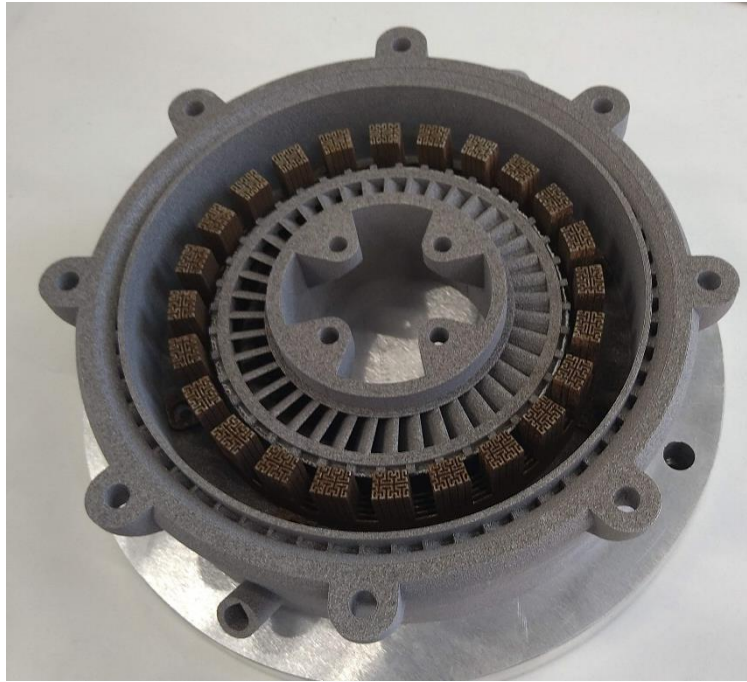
Demonstrator motor created mostly with AM, showing a soft magnetic FeSi stator core and rotor back iron, an aluminium housing and rotor. The bearings and permanent magnets are not created using AM.
